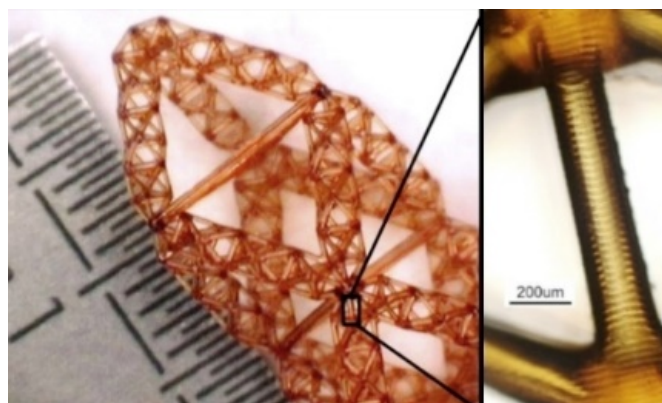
Fractals printed on a 3D printer (image copyright: Coandco)
